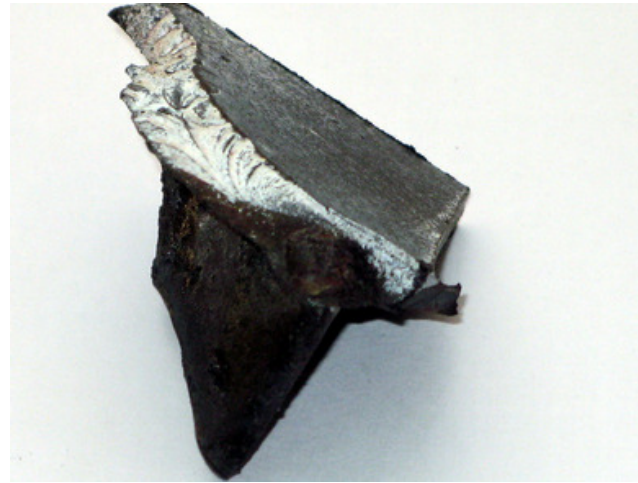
One Sample of Impeller and Chevron Markings on its Fracture Surface
